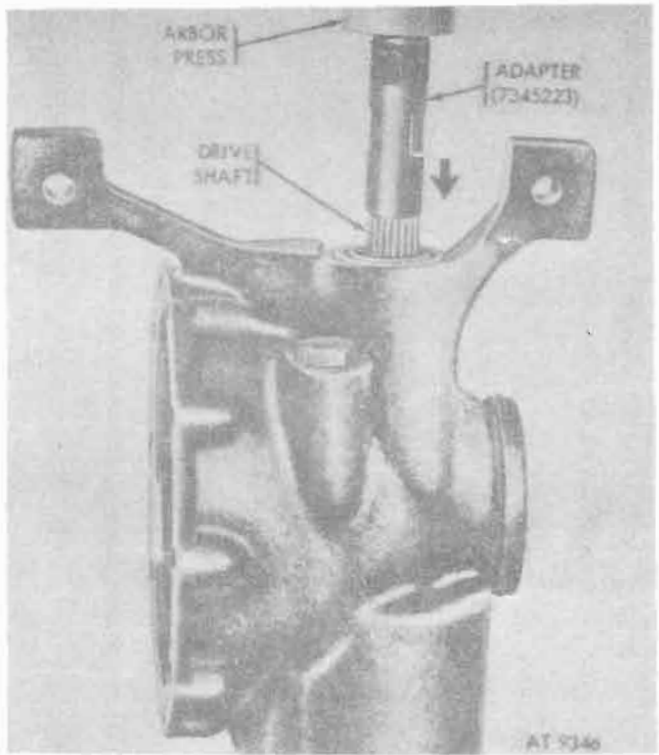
Positioning adapter (7345223) on pinion shaft
